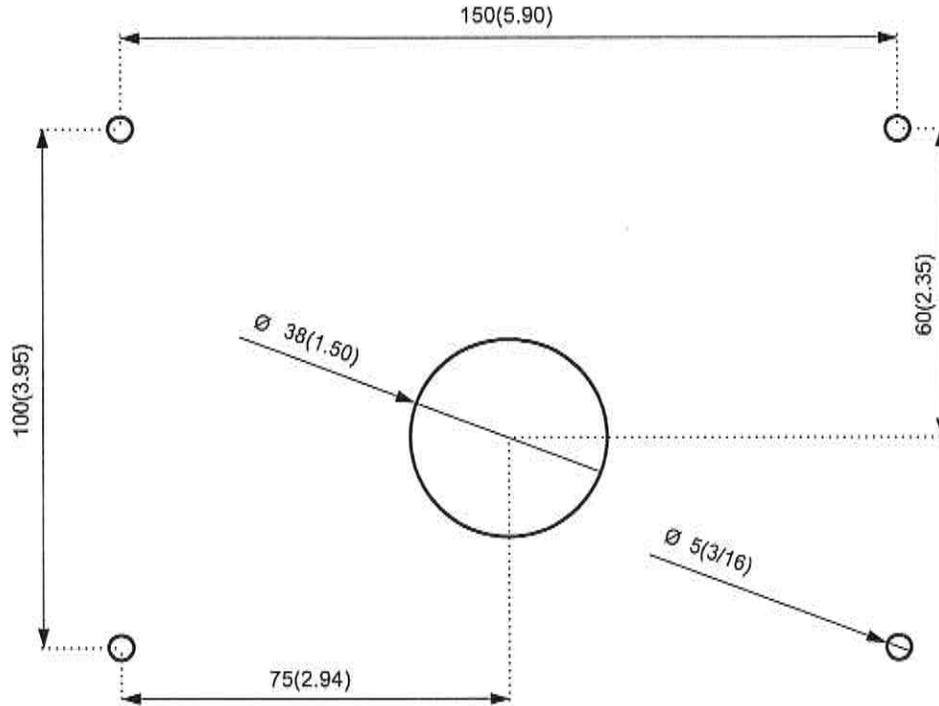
VIA-R cut-out dimensions for flush mounting - mm (inches)
